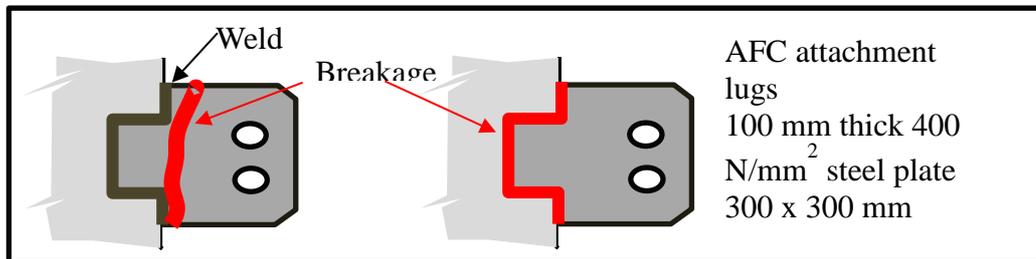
Breakage of welded AFC attachment lugs – 2008
